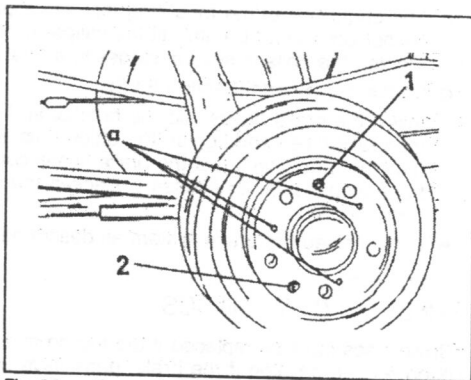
Removal of a brake drum. The drum is secured with the wheel guide pin (1) and a single screw (2). The threaded bores "a" are used to fit the extractor bolts.
